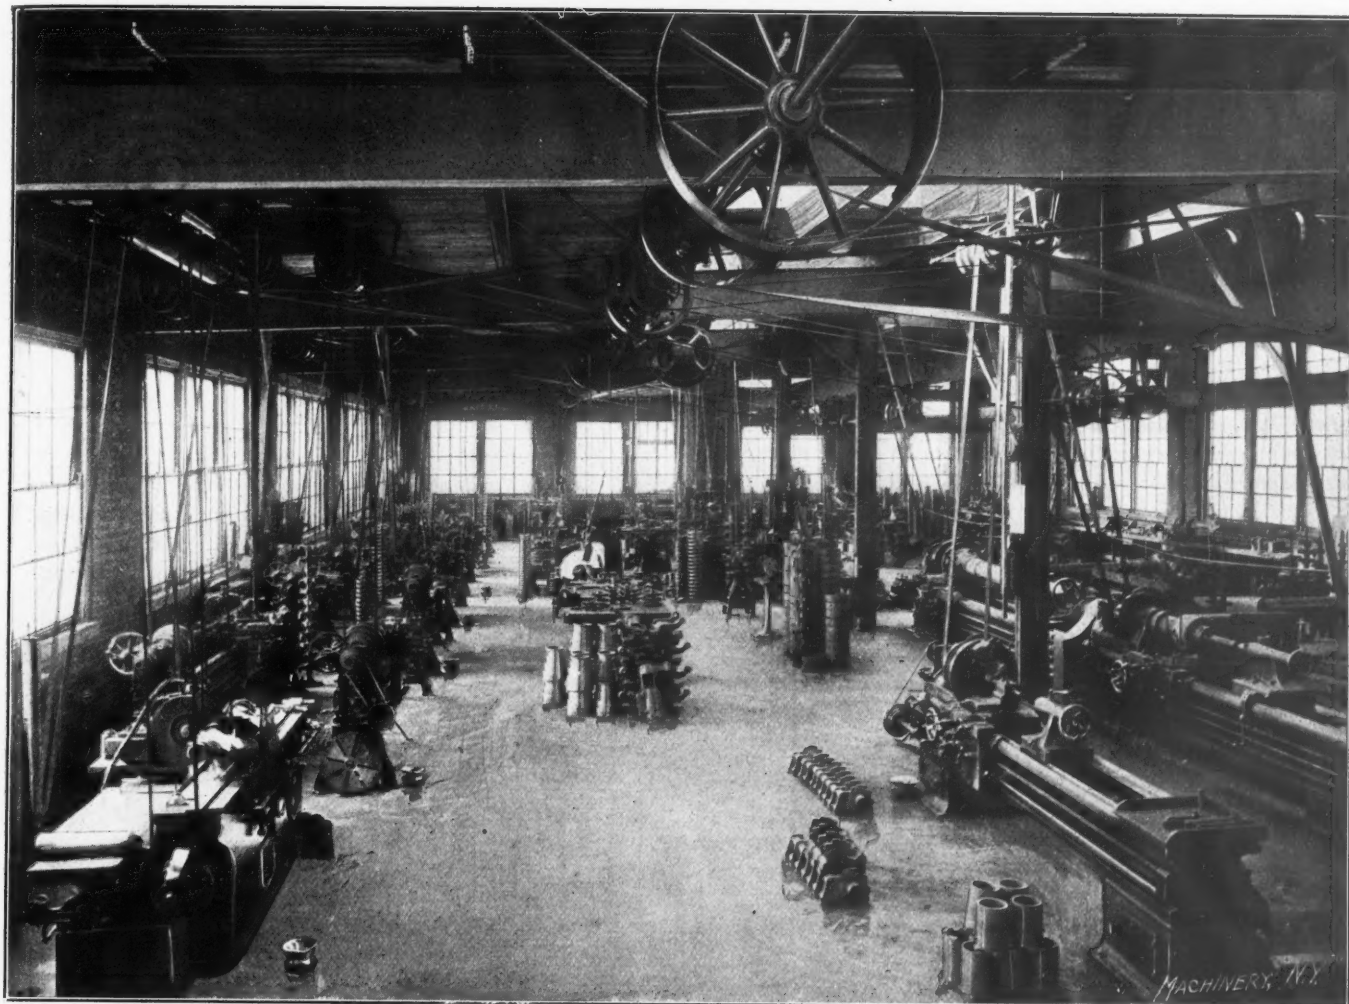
View of the Machine Tool Department of The Mueller Machine Tool Company.
